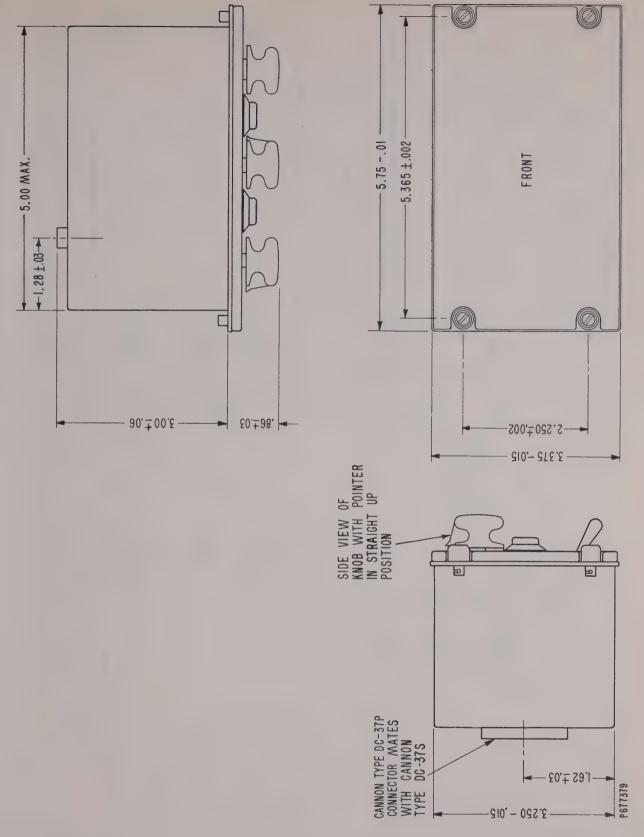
Type CON-1A, CON-1B, and CON-1D Controls, Dimensional Outline Drawing
